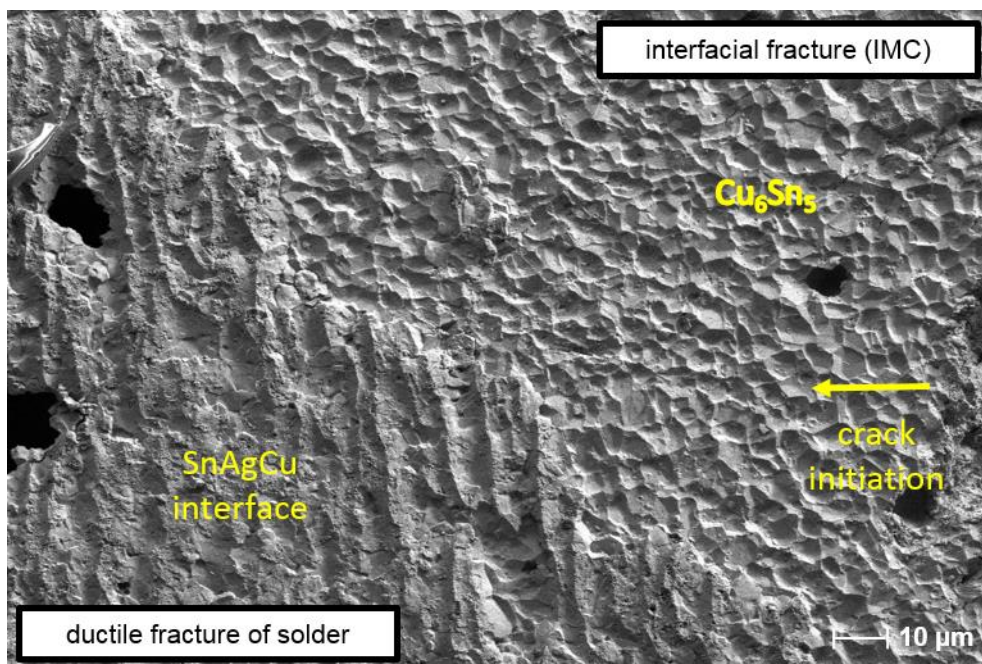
Fracture surface transition from brittle interfacial to ductile solder failure.
